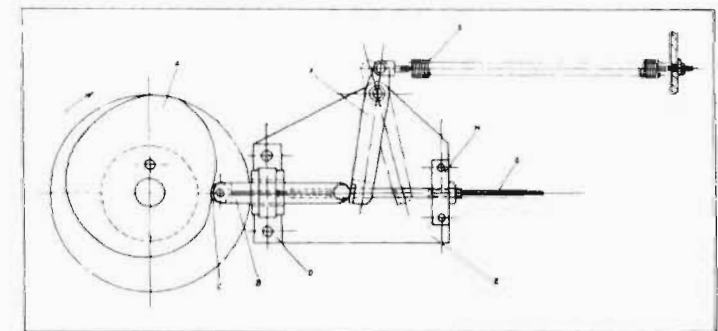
The indexing mechanism for the thread-roller work feed extends spring *S* which actually drives the dial.
